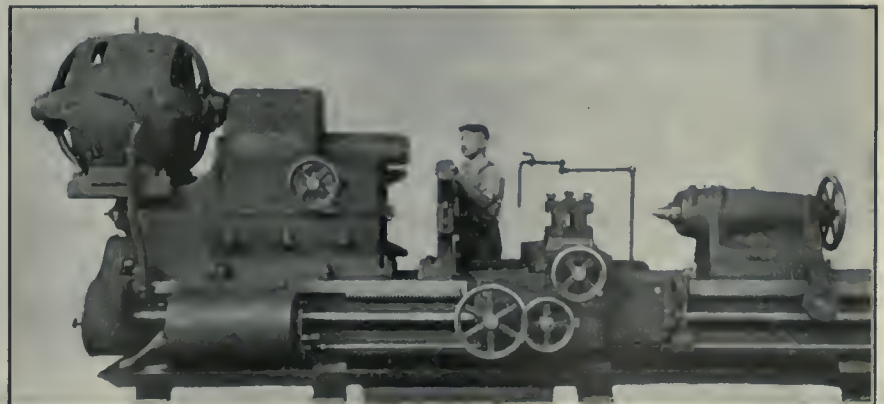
FRONT VIEW OF POND RAPID REDUCTION LATHE.
